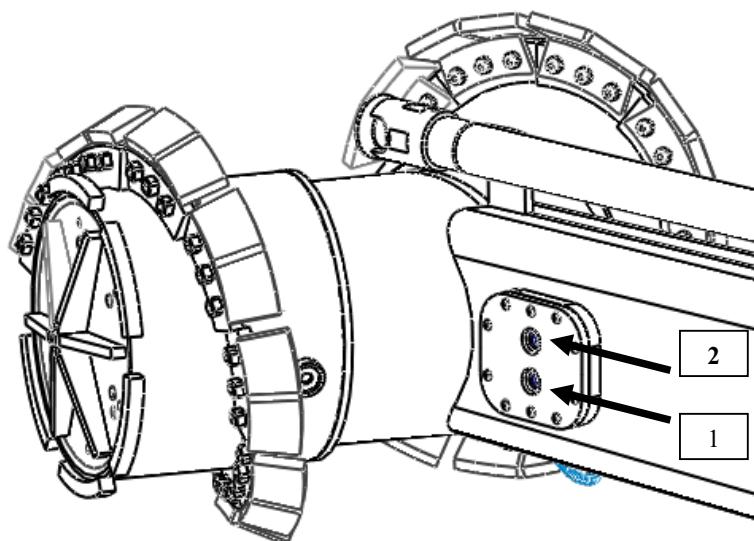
Inspection and inlet/outlet holes for the drum seal oil.
